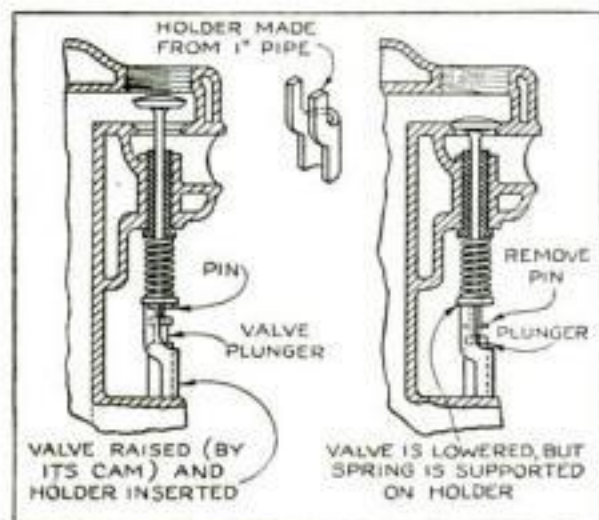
A piece of iron pipe cut out on two sides is handy tool to hold up valve spring.
